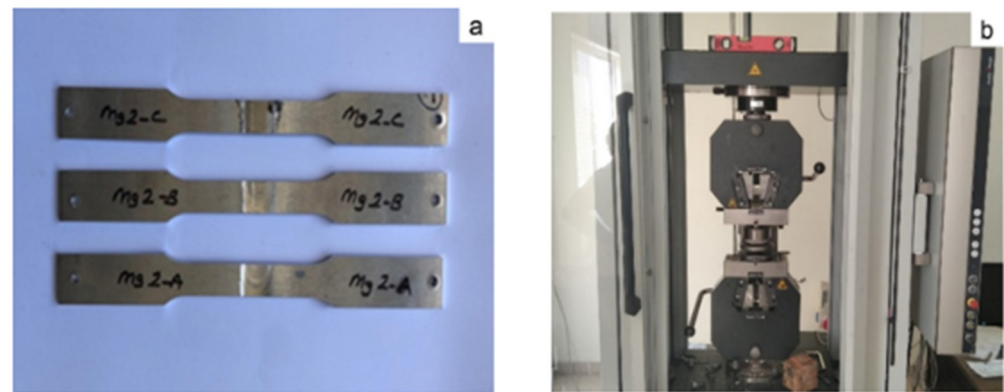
The tensile testing setup and the specimen geometry were provided: (a) tensile specimens according to ASTM E8M-04; (b) universal testing machine (Zwick/Roell) for mechanical checking.
